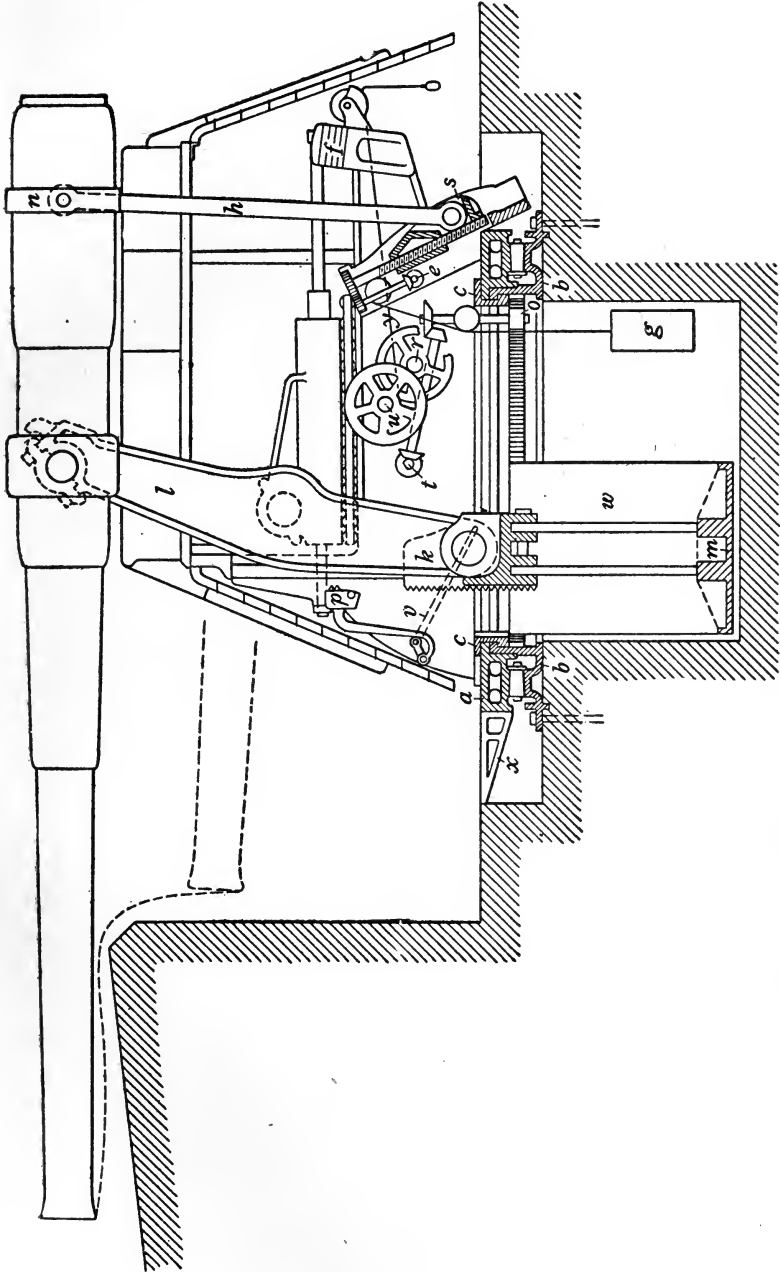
12-inch Gun on Disappearing Carriage, Firing Position.
